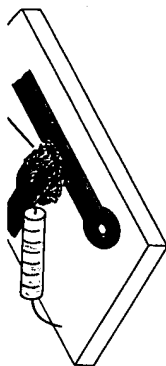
Shorted printed circuit conductors; short caused by use of excess solder.
